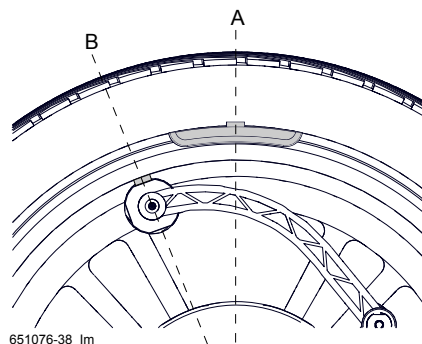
Attaching an adhesive balance weight using the electronic rim distance gauge
